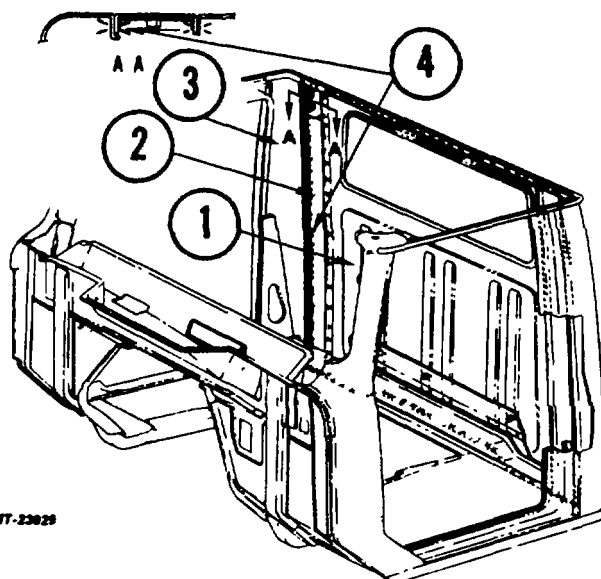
Side Panel to Back Panel Spot Welds
